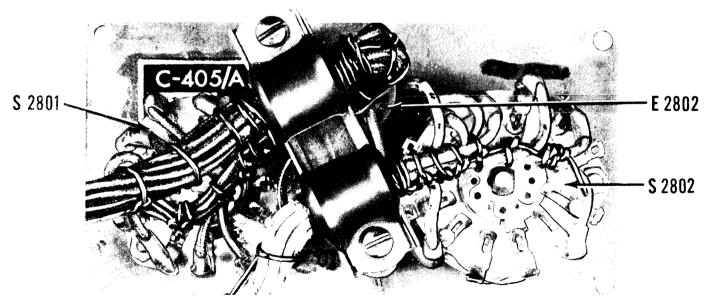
Control Panel C-405/A -- Rear View, Open
